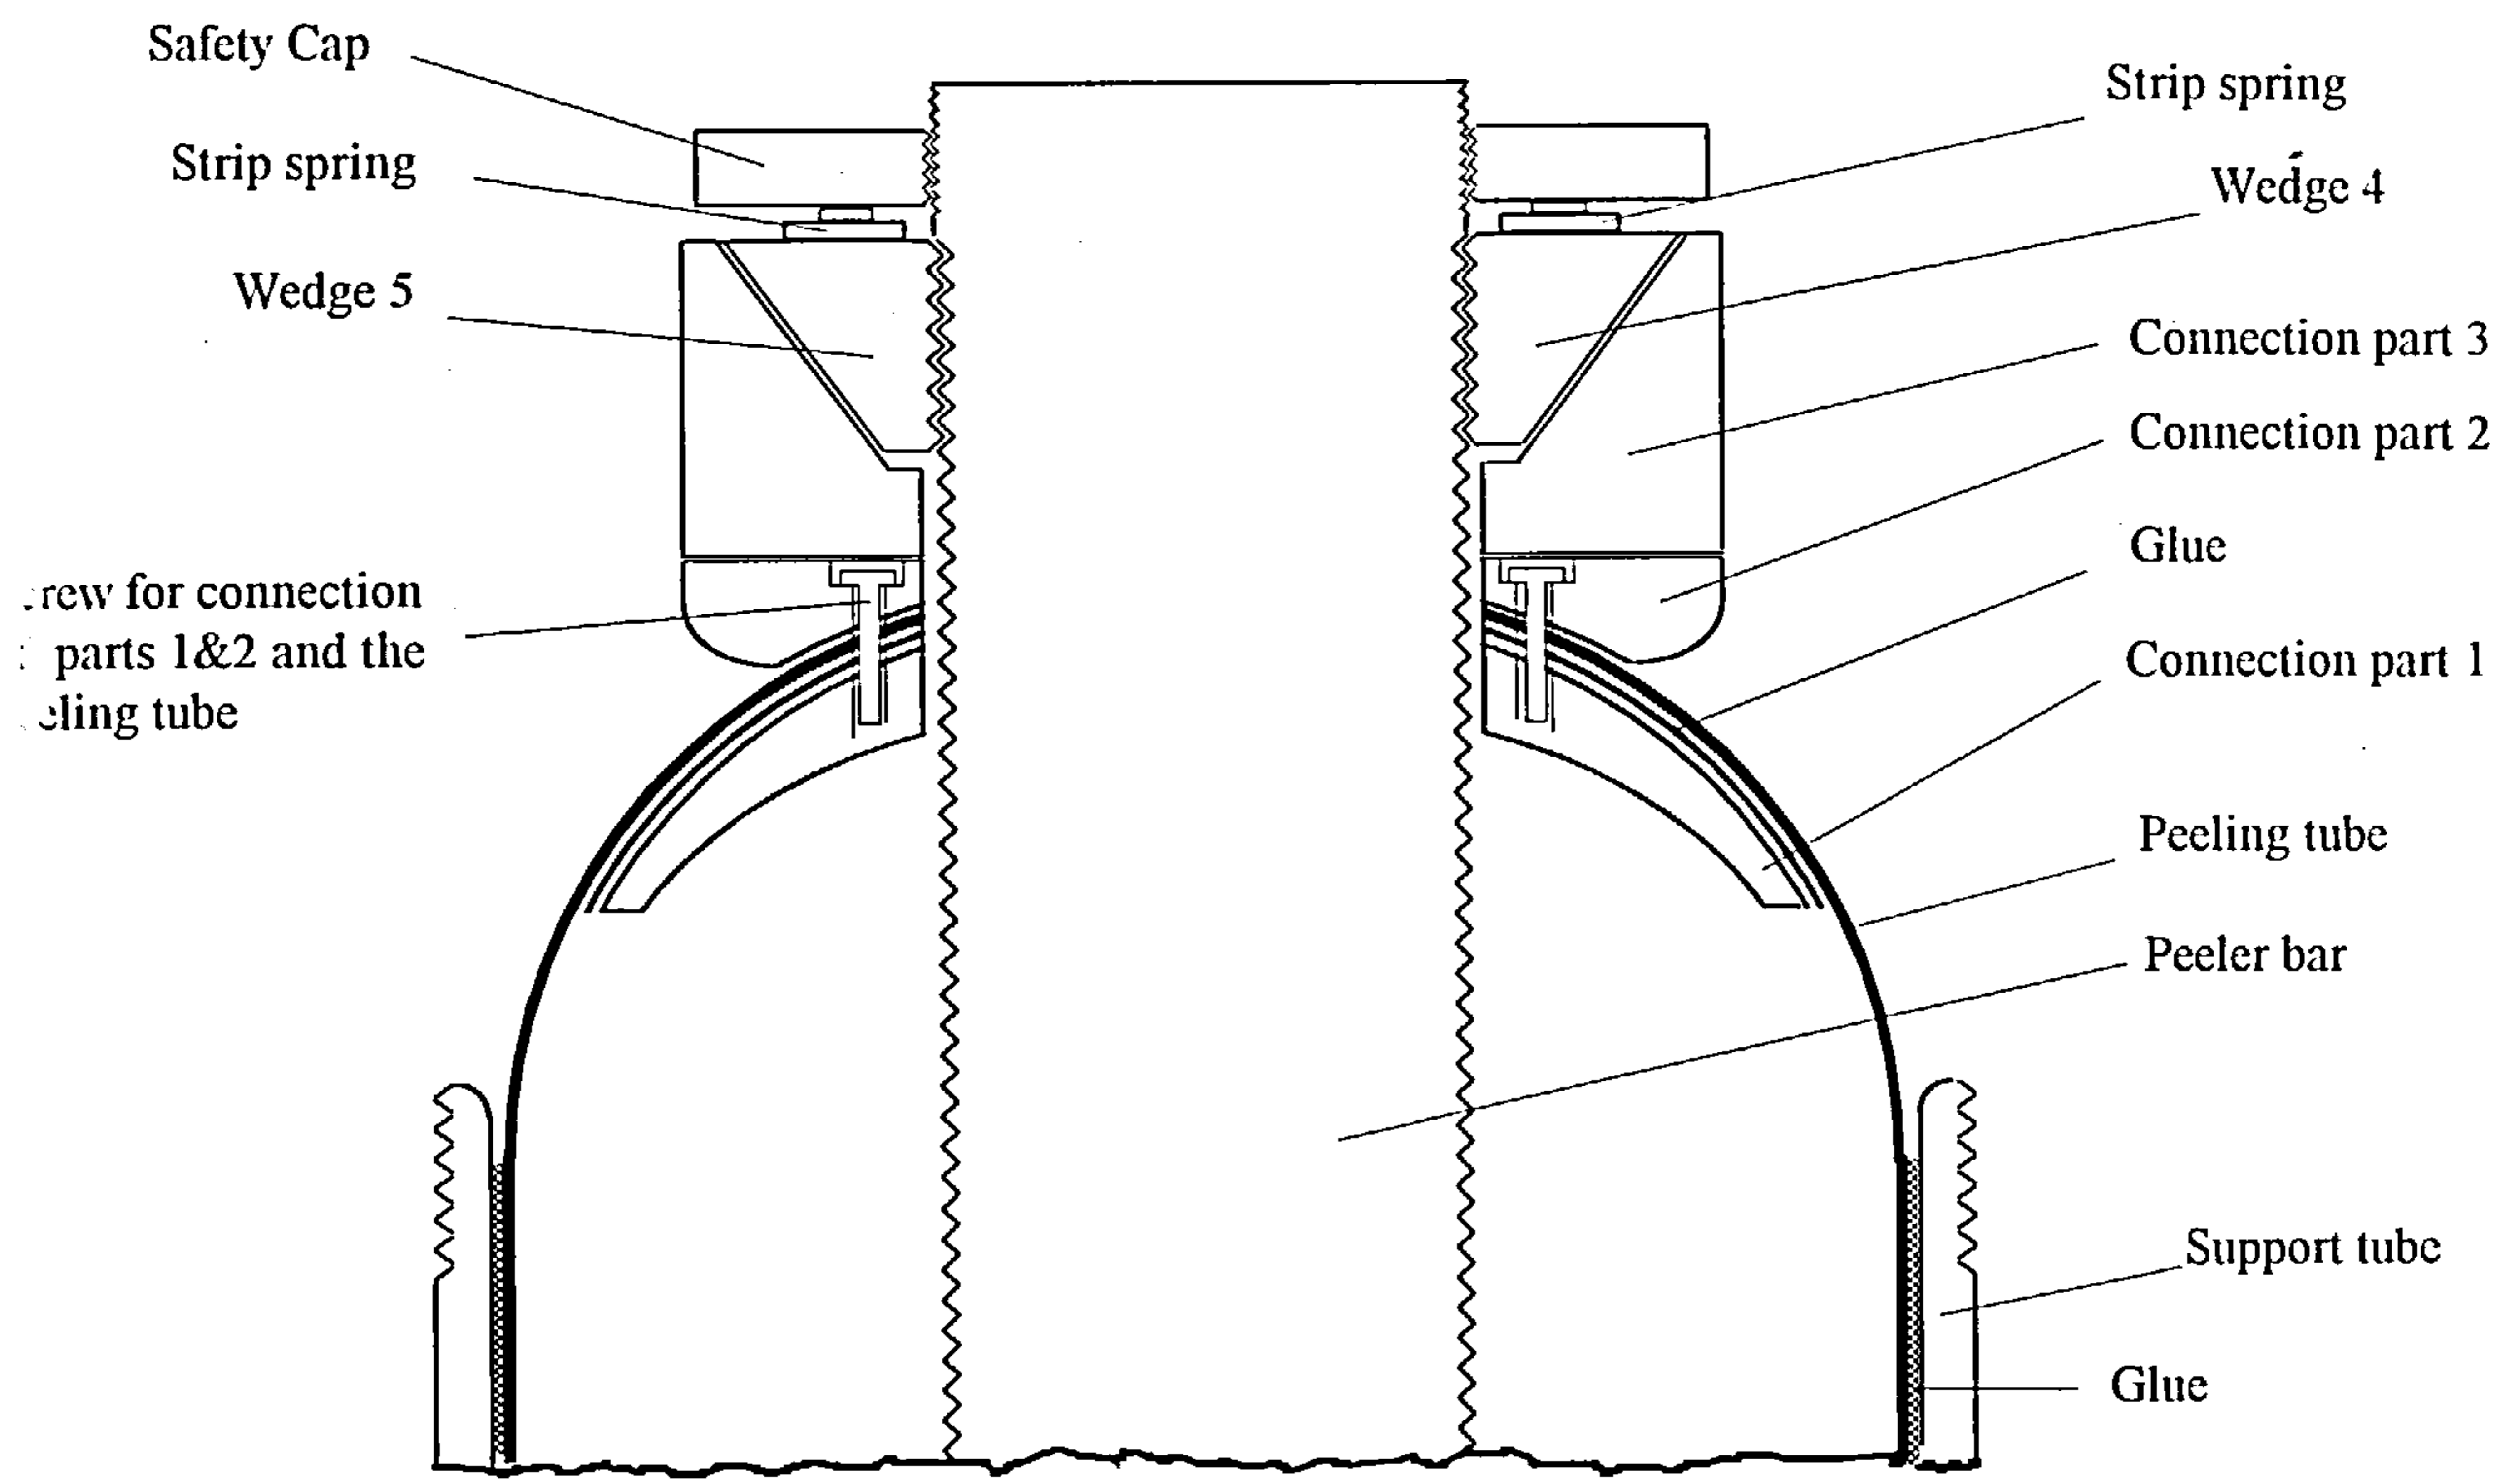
Connection of peeler tube to the peeler bar and support tube
